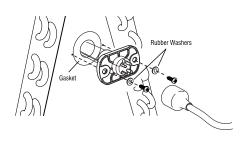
Insert lamp into delta plate knockout and secure with screws and washers. Connect remote lamp extension cord.
